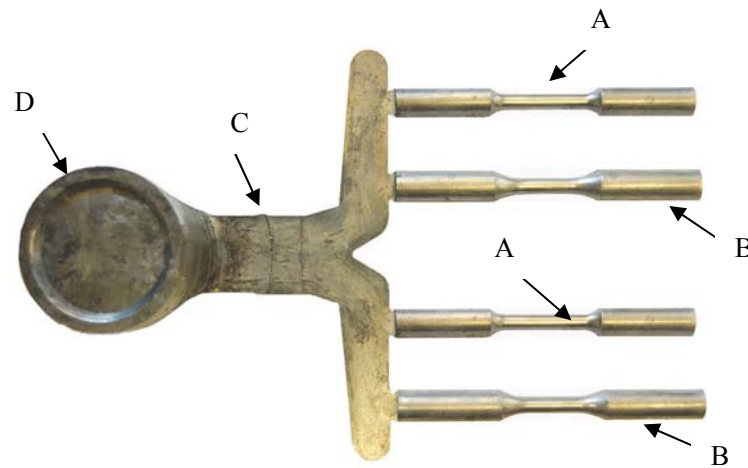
Schematic illustration of a die-casting sample produced by the HPDC machine (A) Tensile sample (diameter 6.4 mm), (B) Fatigue sample (diameter 6.3 mm), (C) Runner, and (D) Biscuit.
